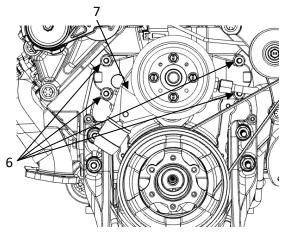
Remove four (4) Bolts (6) to remove Water Pump (7)
